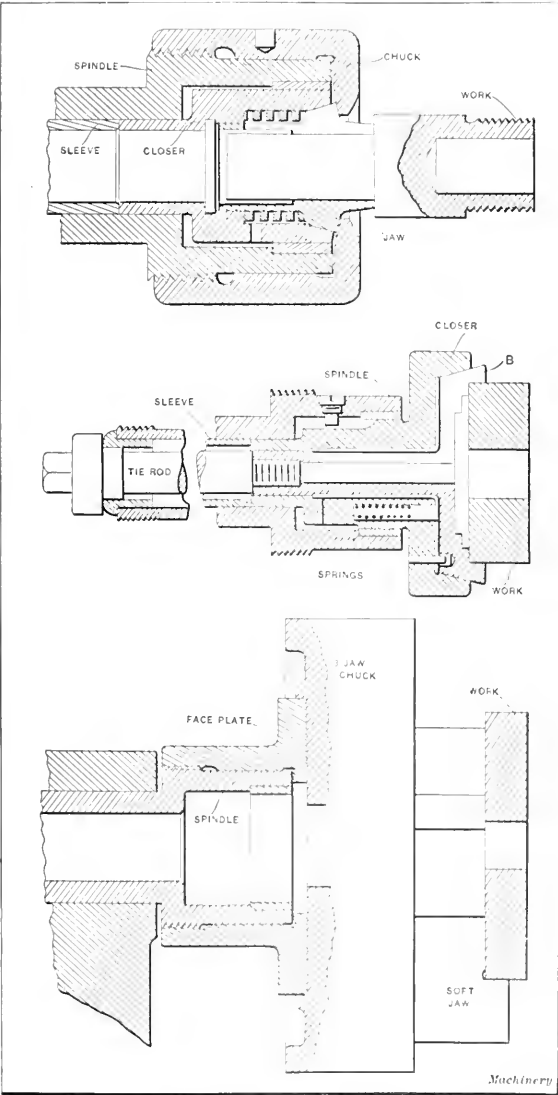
Collet Chucks and Soft Jaw Chuck for External Holding of Small Work
